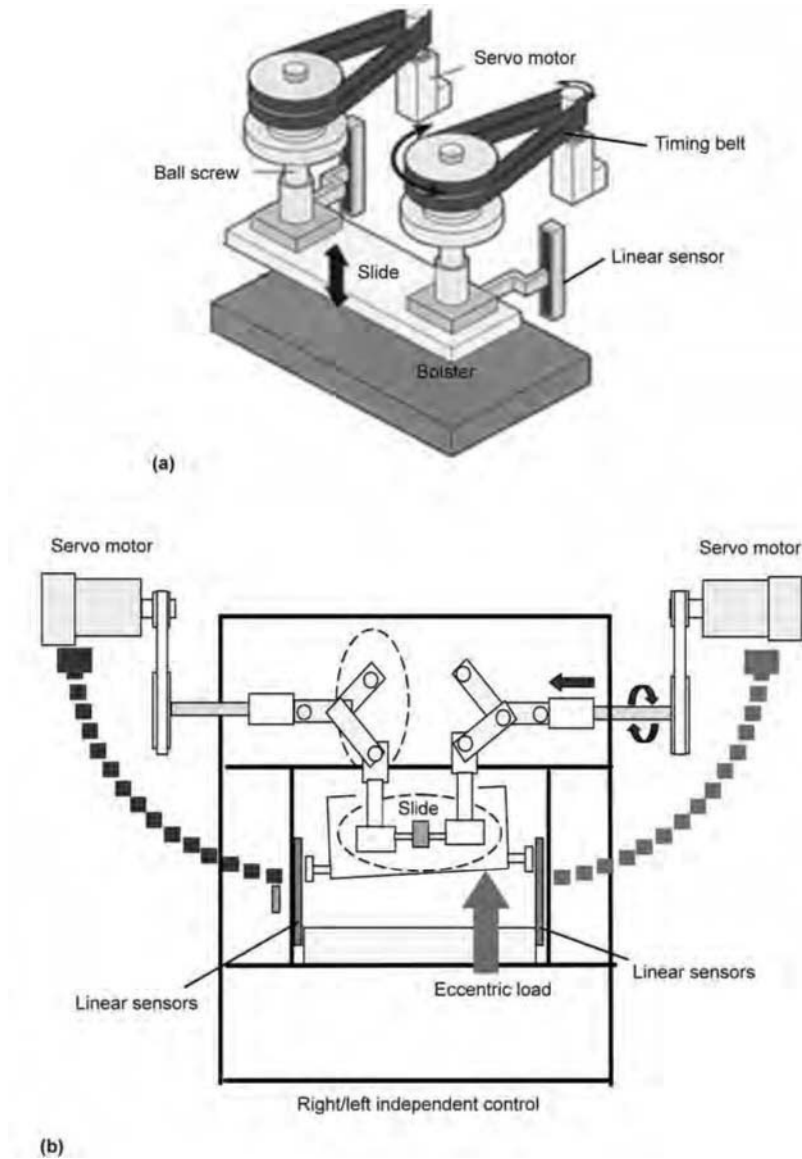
Schematic of servo presses with high-speed/low-torque servo-motors (a) with belt and ball screw drive and (b) with ball screw and linkage drive. Source: Ref 11.9
